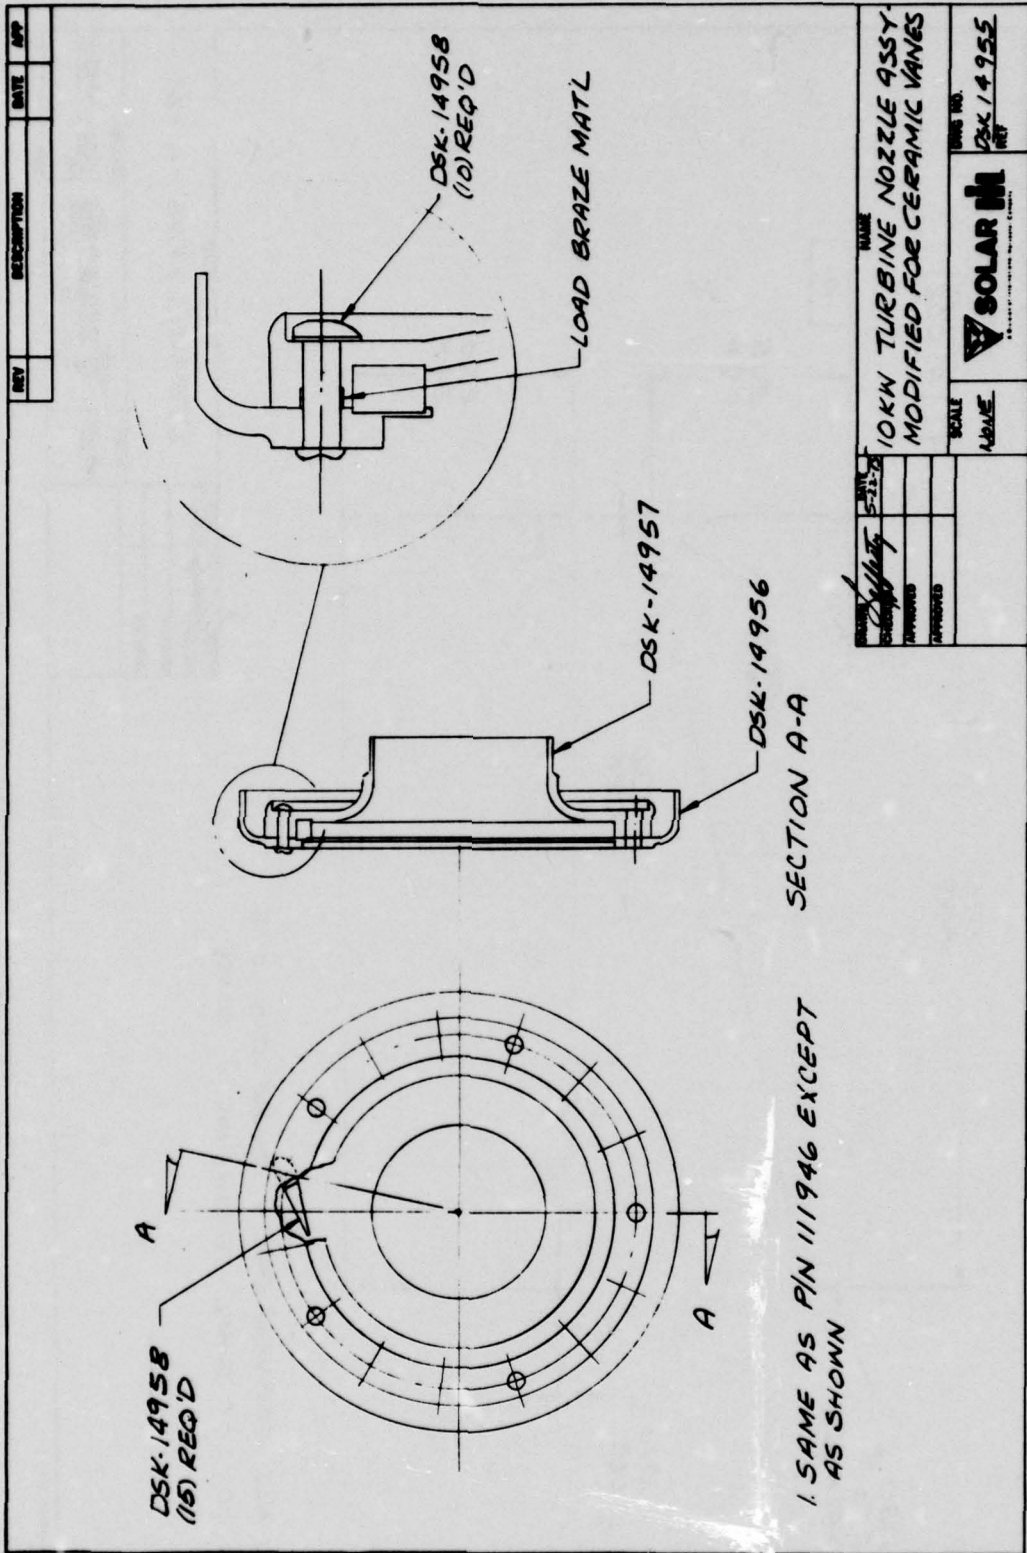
10KW TURBINE NOZZLE ASSEMBLY MODIFIED FOR CERAMIC VANES
